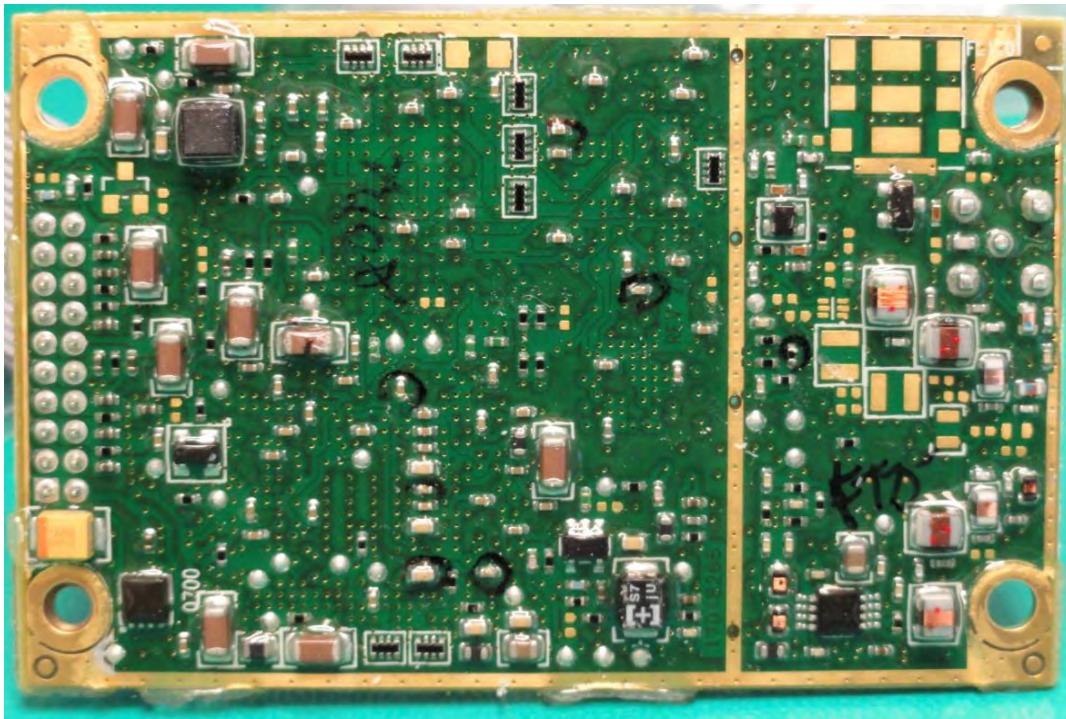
Bottom side view of GPS board, post reaction wheel failure; black circles indicate impact areas where damage occurred.
